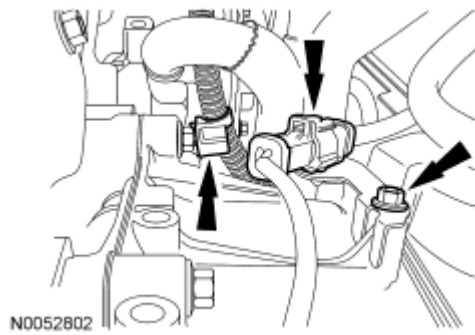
Identifying Heated Oxygen Sensor (HO2S) Bracket & Stud Bolt
